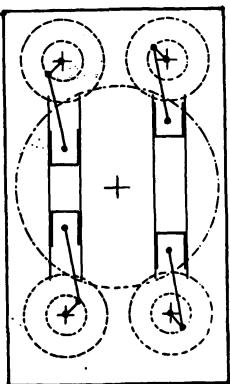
Outline Sketch of the 58-D-3 Two-Stroke Counterpiston Diesel Engine.
